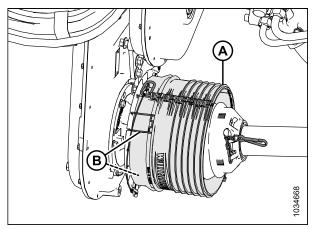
Driveline with Shield Installed on Float Module Gearbox
